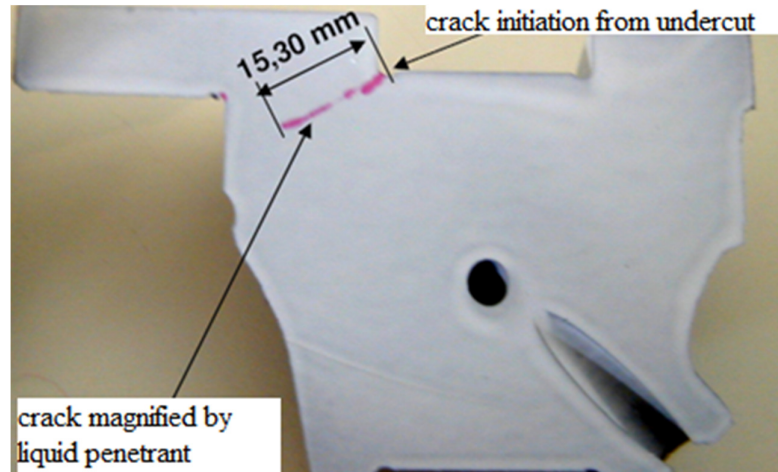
Crack along the section magnified by liquid penetrant (from 38MnVS6 crankshaft sample rolled at 12.5kN).
